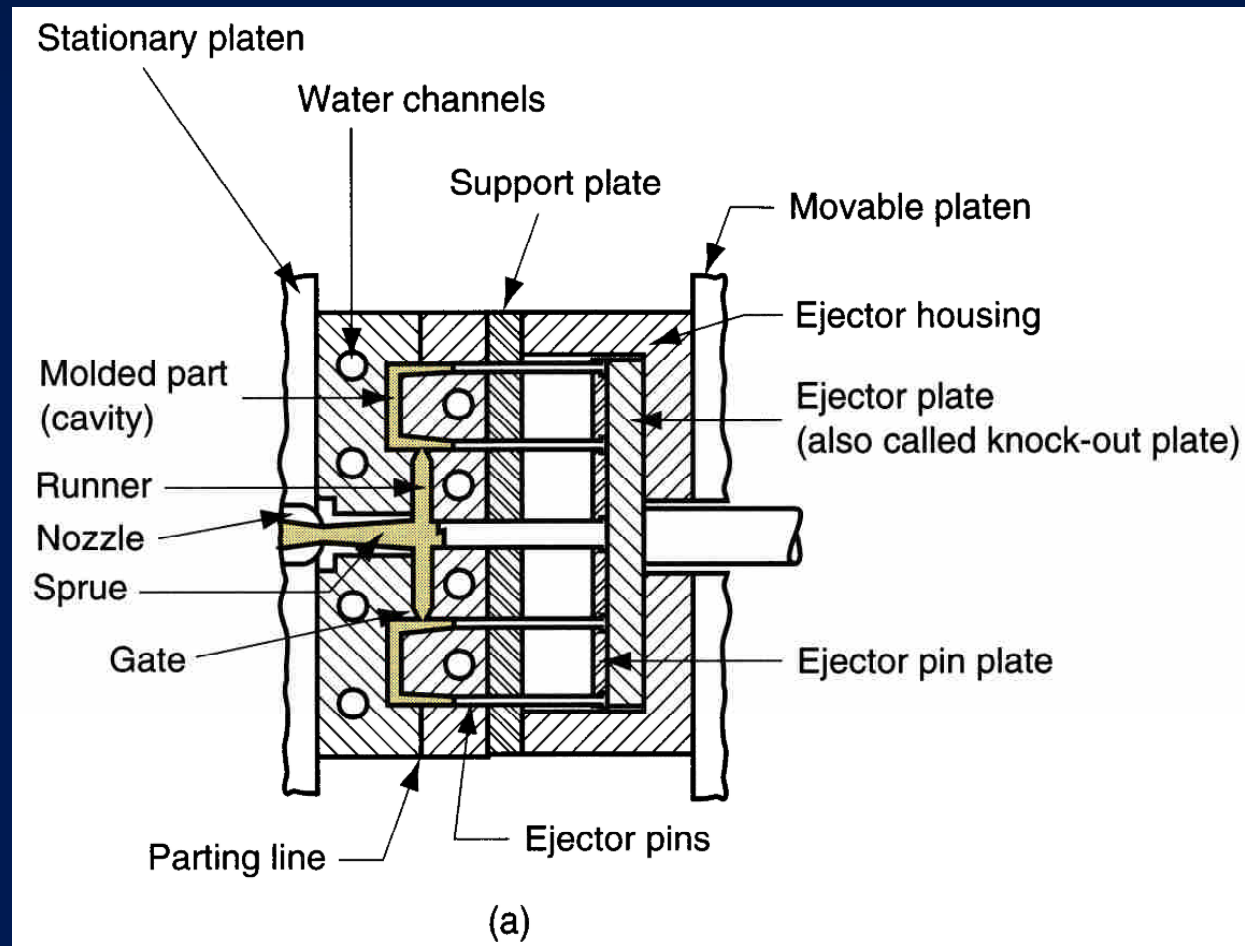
Details of a two-plate mold for thermoplastic injection molding: (a) closed. Mold has two cavities to produce two cup-shaped parts with each injection shot
